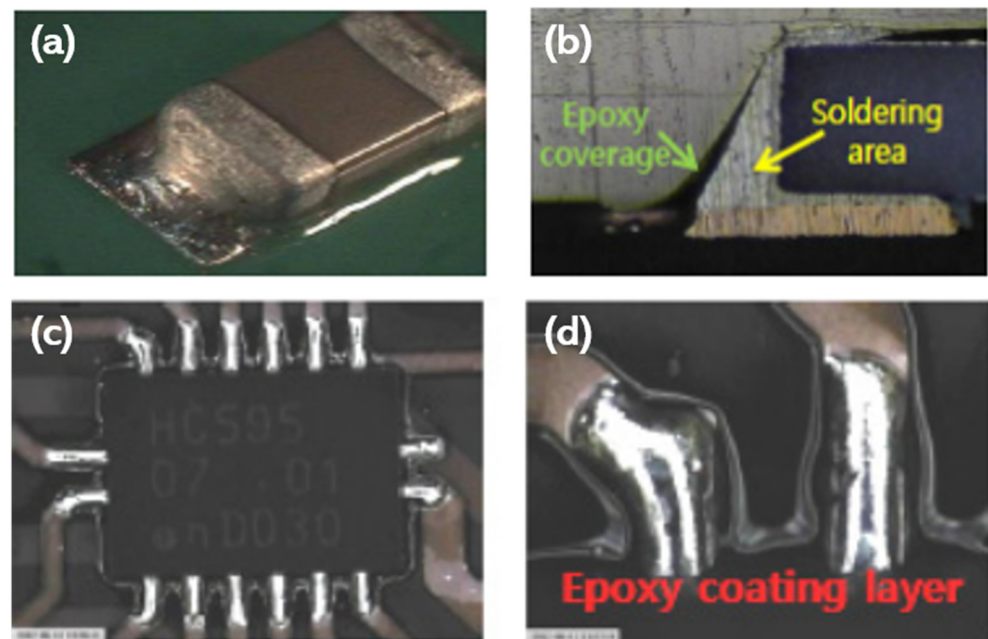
Actual images of devices surface-mounted using epoxy solder paste, reproduced from [33], with permission from Journal of welding and joining, 2015. (a) Capacitor soldered using epoxy solder paste, (b) cross-section of capacitor-epoxy solder joint, (c,d) Integrated circuit (IC) and the high magnification image of IC leg soldered using epoxy soldered paste respectively.
